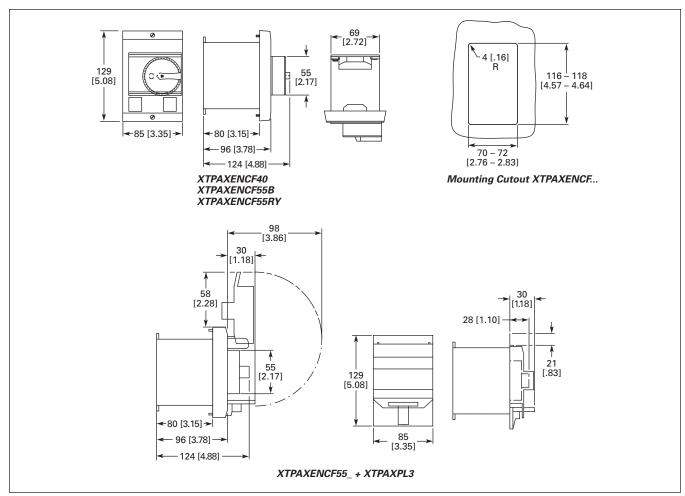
Insulated Enclosures for Flush Mounting of XTPR...B Manual Motor Protectors (Approximate Dimensions in mm [in])
